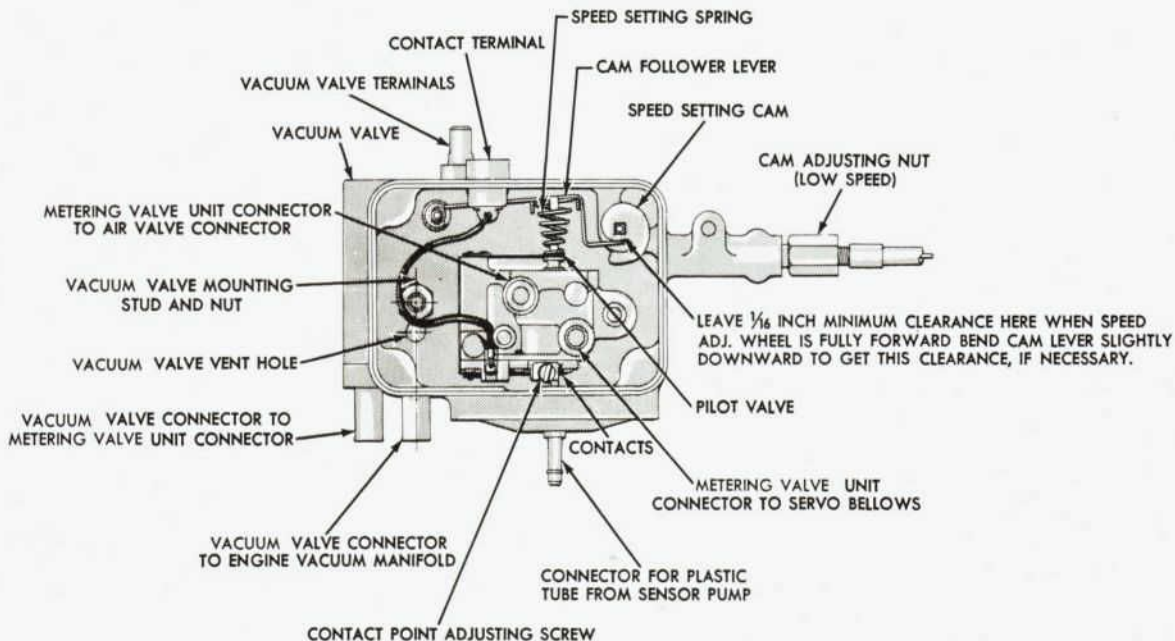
Metering Valve Unit—mounted on the left-hand fender well.
